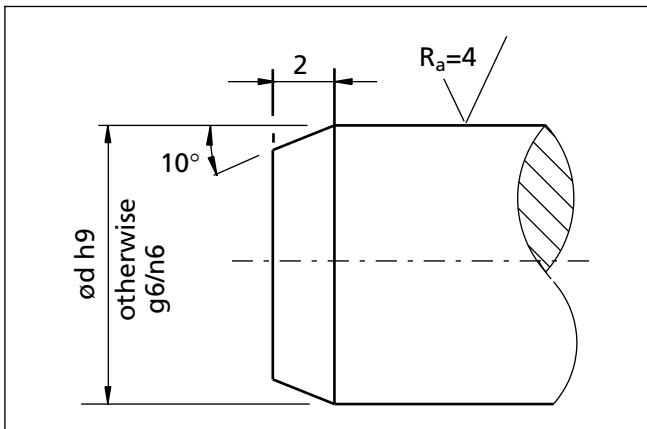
Tolerance of the shaft, surface roughness and chamfer of the shaft
